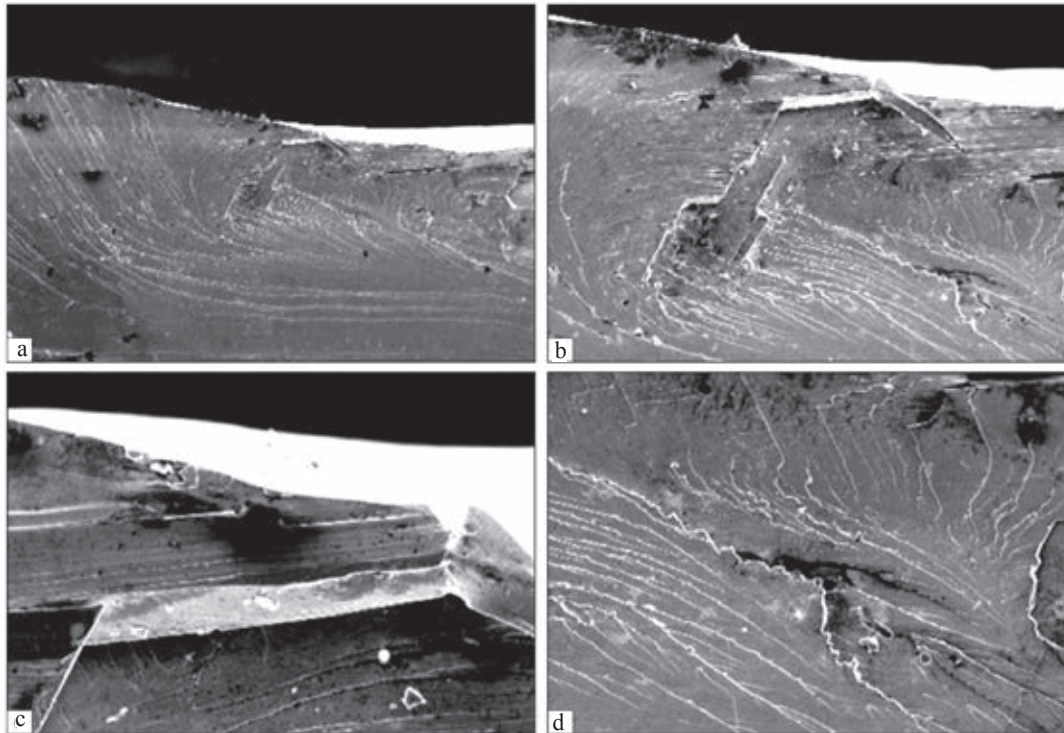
Fatigue fracture (fracture surface) formed in the body of the rib of the end of the shank on the side of the blade trough ($\sigma_a = 110$ MPa, $N_f = 6.8 \cdot 10^6$ cycle; oscillation amplitude 320 μm): a) general view of the fracture surface; b) crystallographic zone; c) fracture zone; d) the zone of crack propagation: a) $\times 40$; b) $\times 100$; c) $\times 400$; d) $\times 200$.
